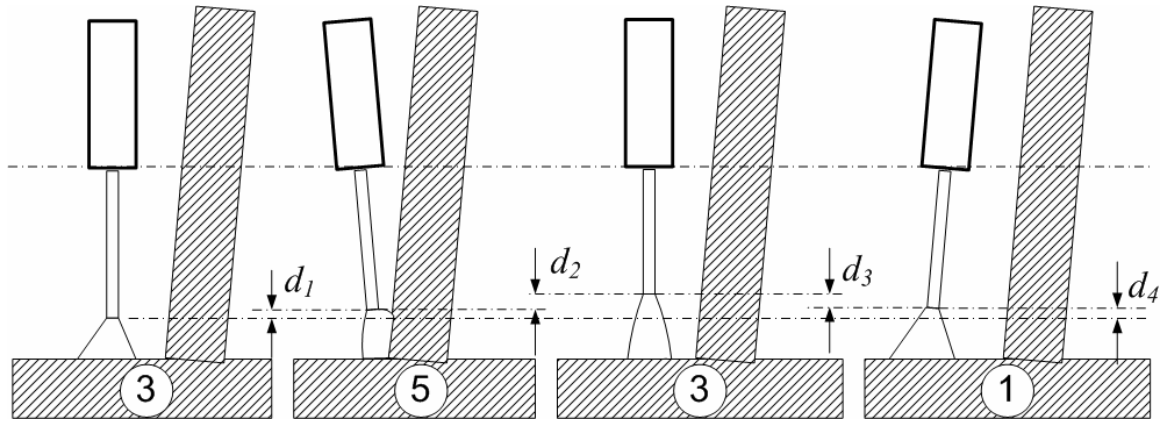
Arc length and wire extension behaviour in single sidewall process
